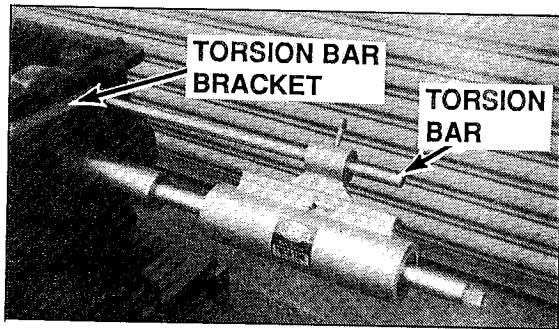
FEED UNIT INSTALLED ON THE TORSION BAR
